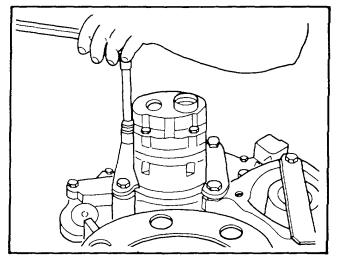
Removing or installing hydraulic pump retaining capscrews.
